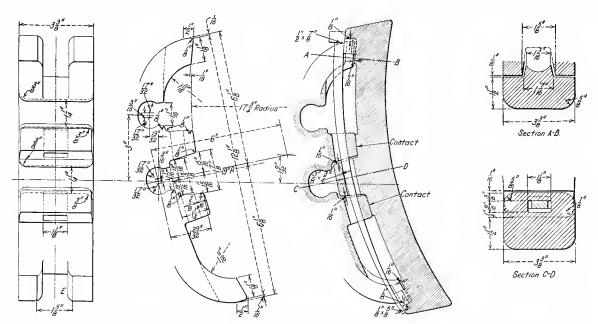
M. C. B. Standard Brake Head. (M. C. B. Sheet 17.)
